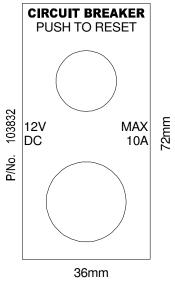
Section 2 Circuit Breaker and Power Socket Placard
